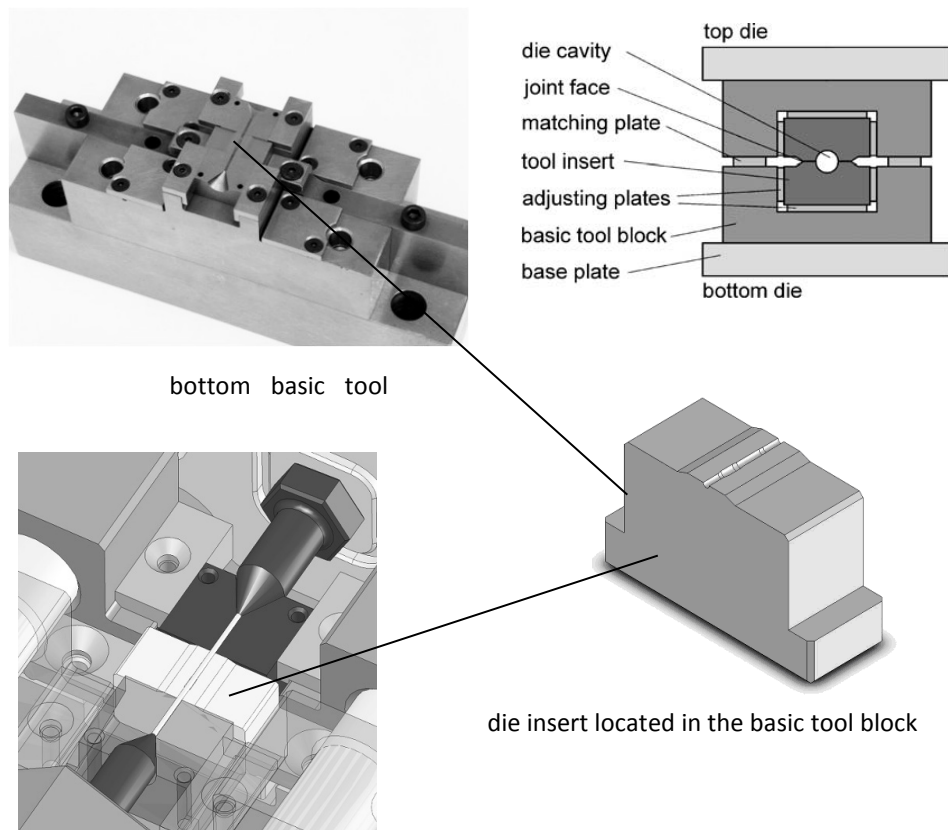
Bottom basic tool block [101] of the micro-hydroforming tool (top left), cross-section (top right) [3] and die insert with cavity (right & left below)
